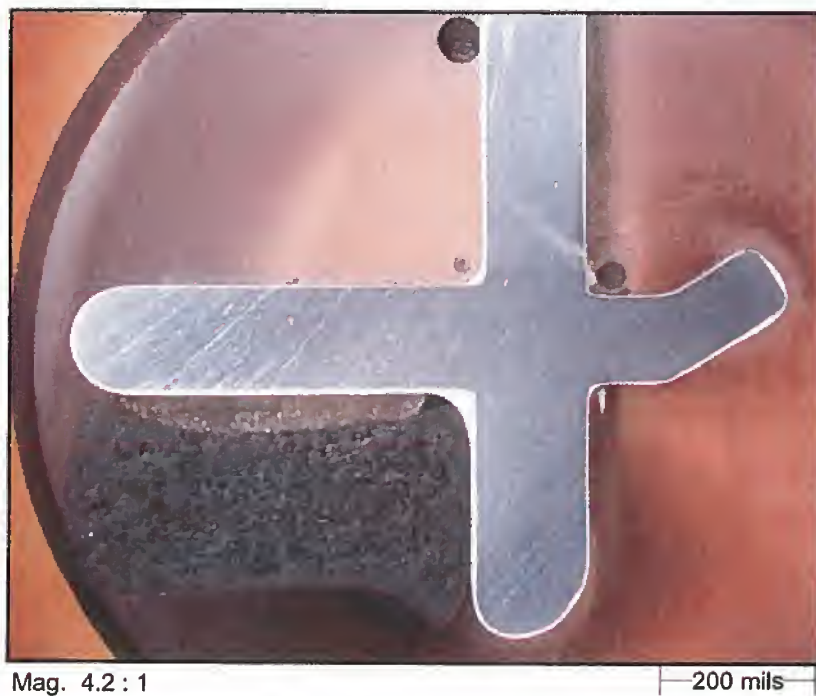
Sample #3: Schreader, new. Mount 3-2. An overall view of the mounted cross-section. The white surface is the coating.
